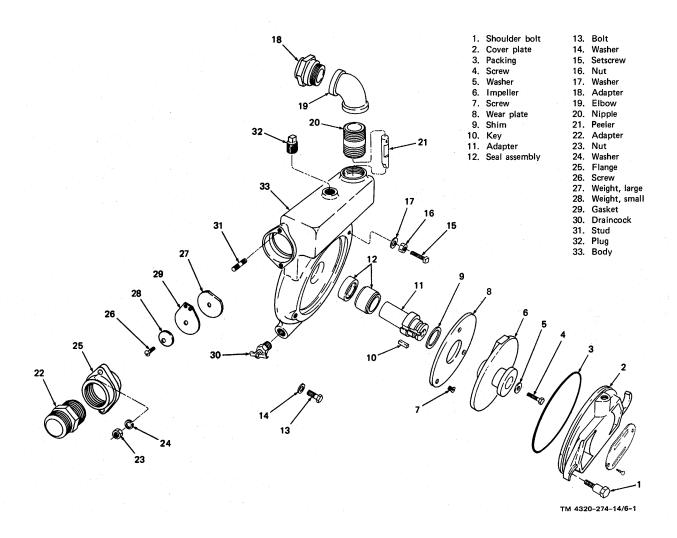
Centrifugal pump assembly, disassembly and reassembly.
